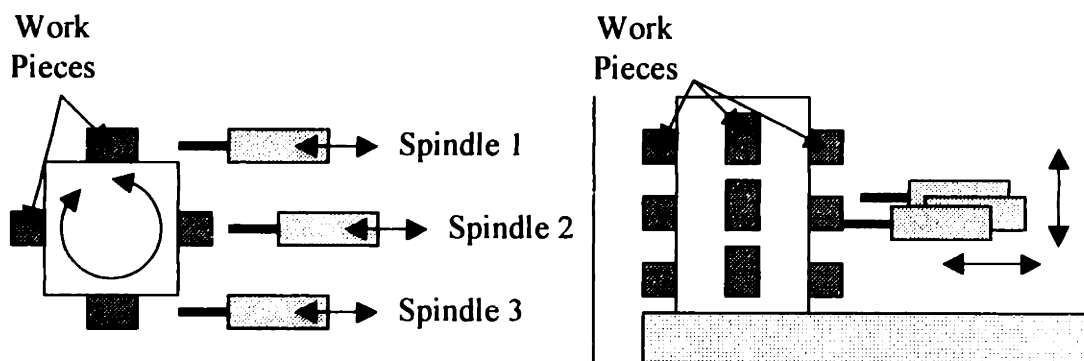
Schematic View of a Fixture (Top View: Left, Side View: Right)
